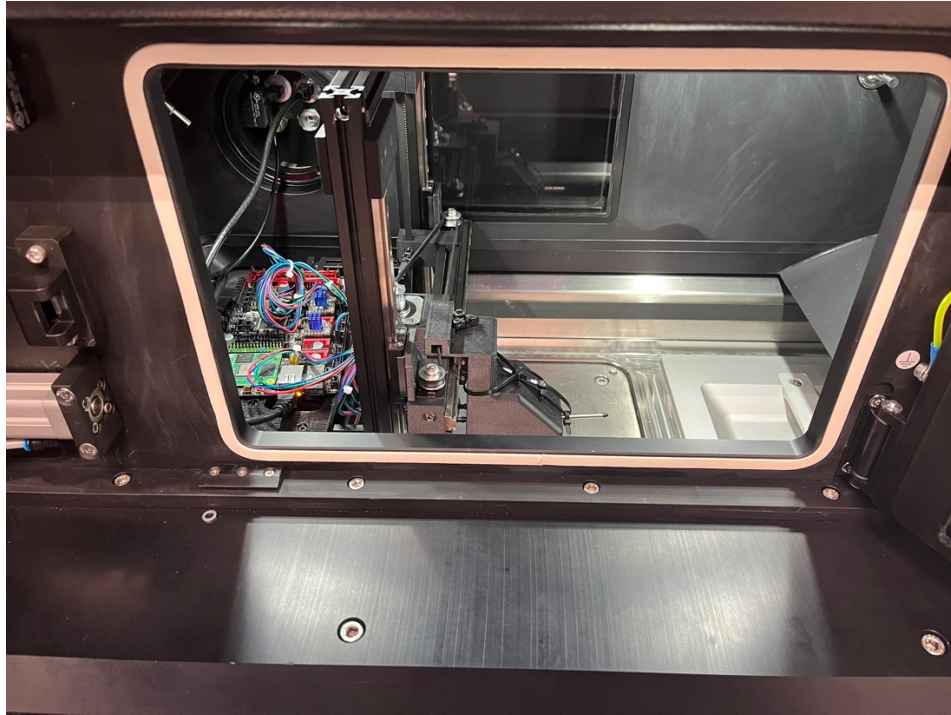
Final airflow measurement device fully assembled in the build chamber (side view)
